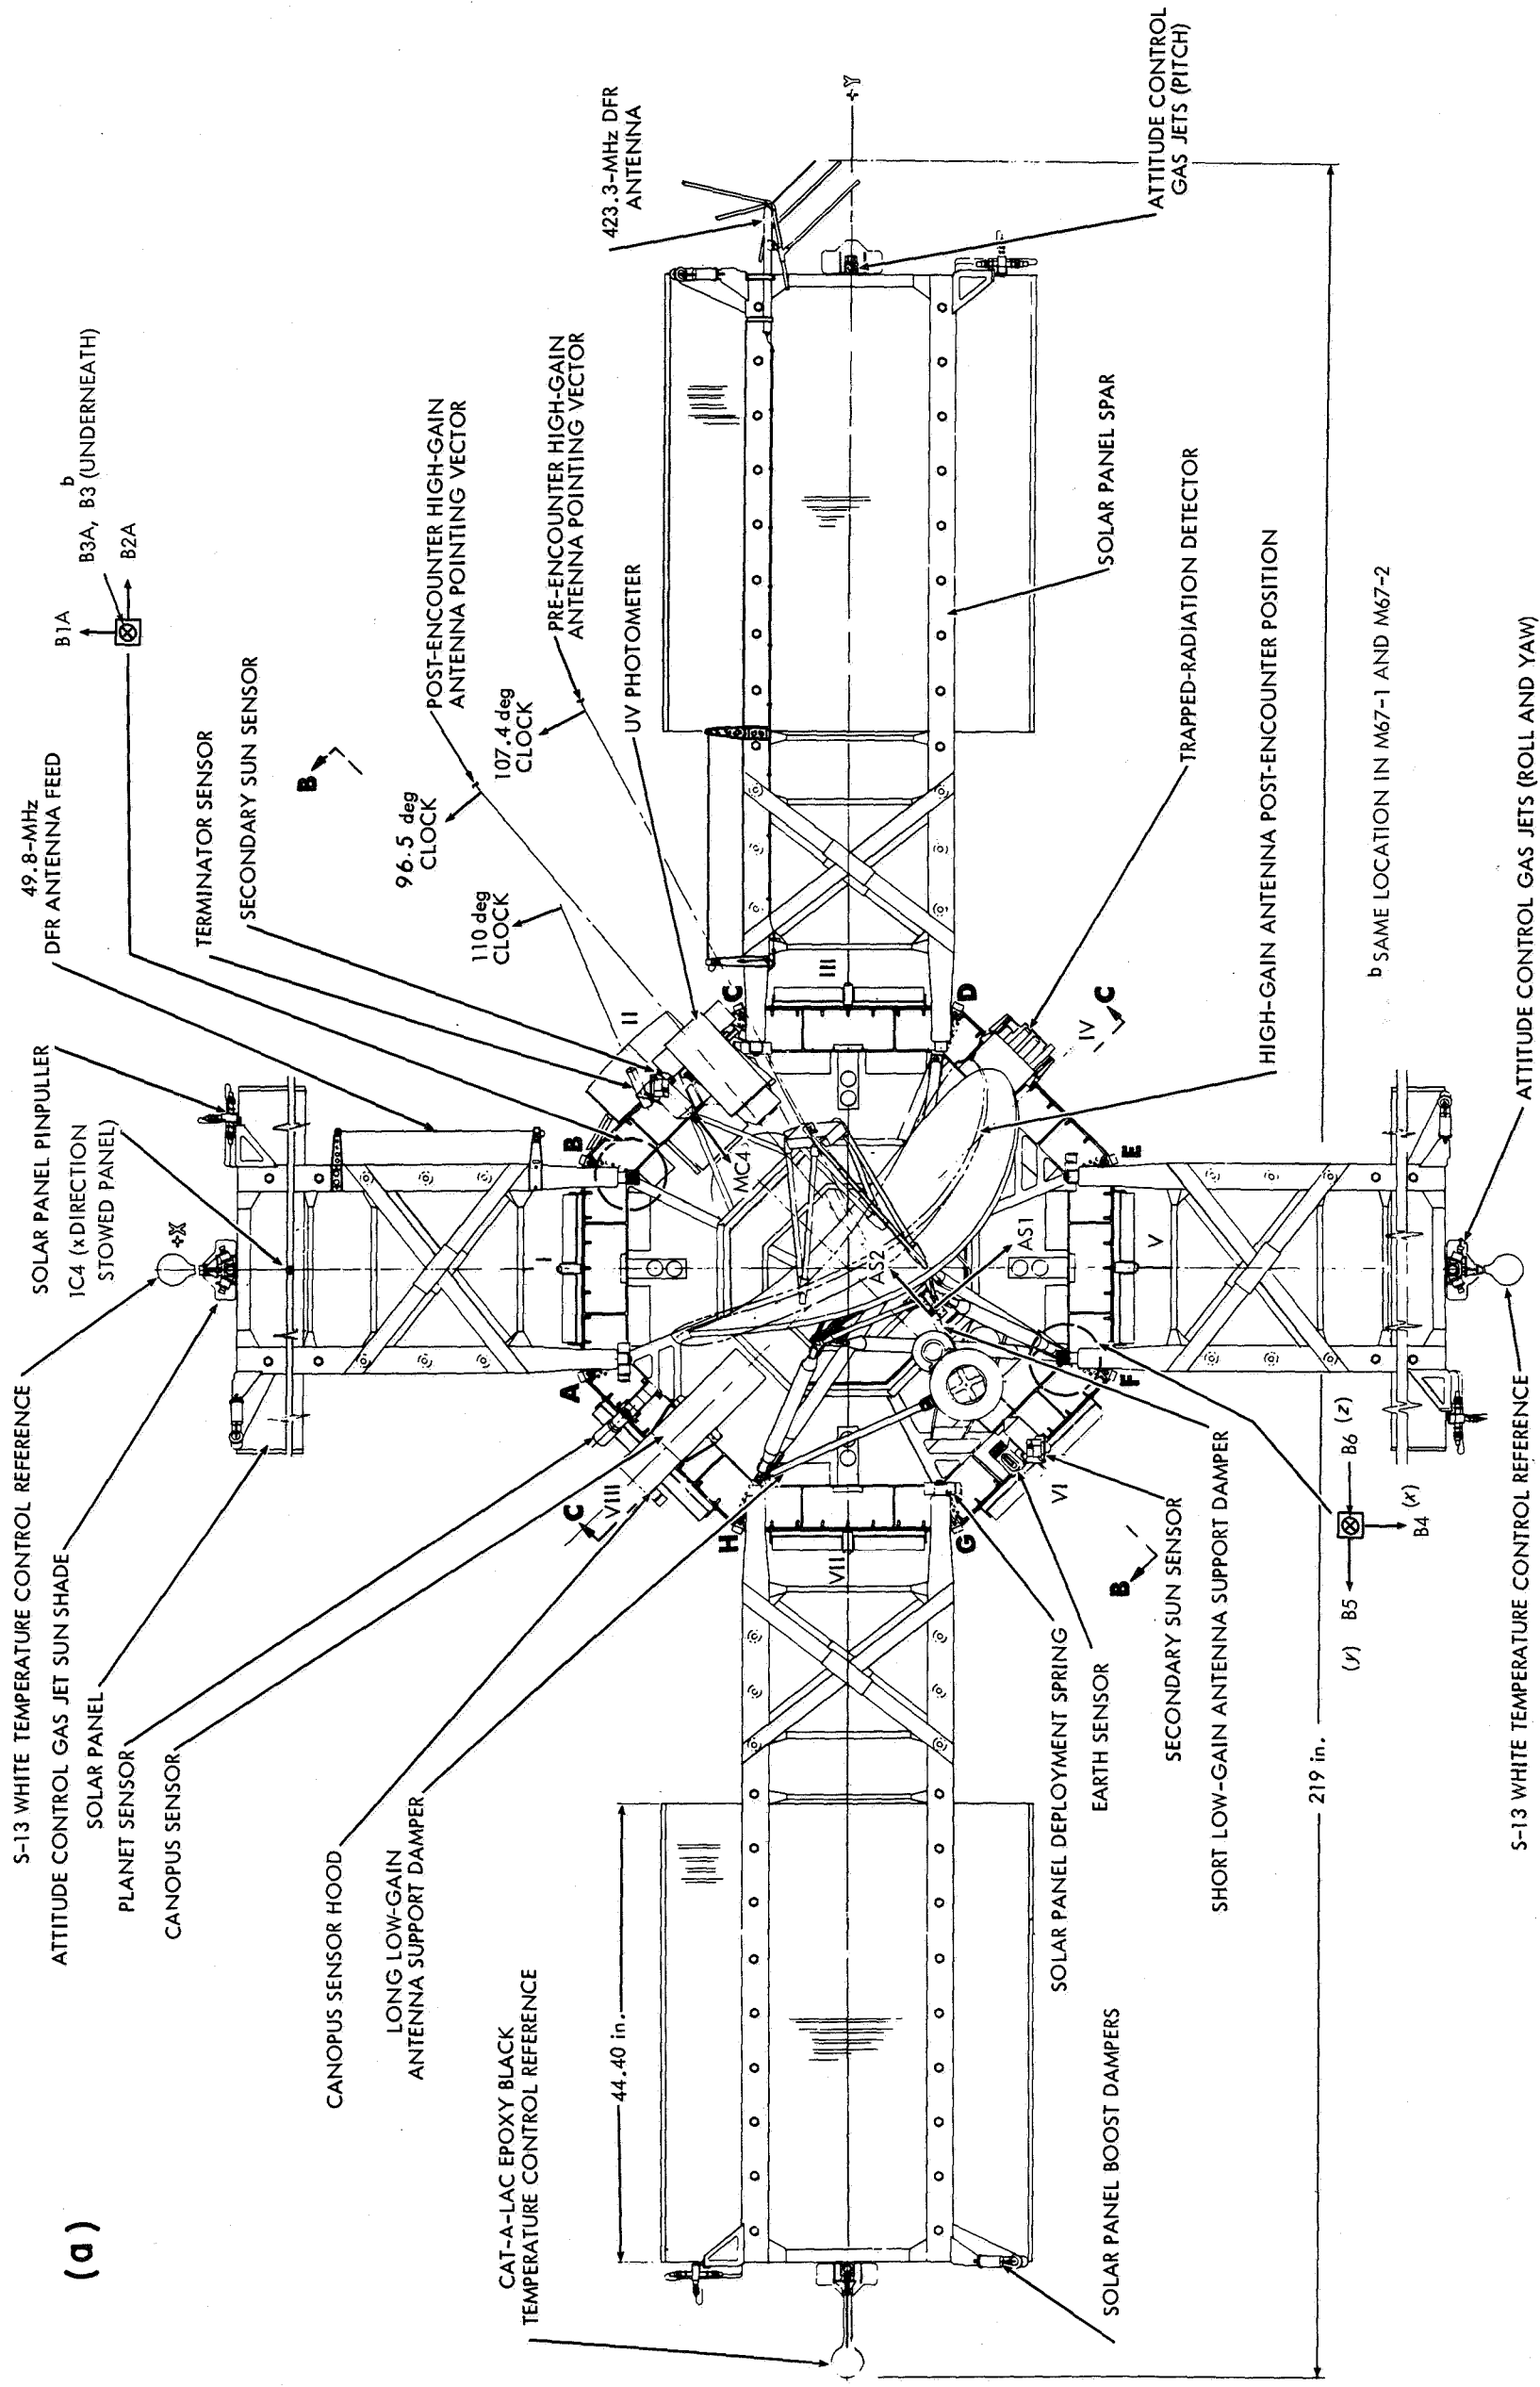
Accelerometer location MCV4; midcourse motor fuel valve
